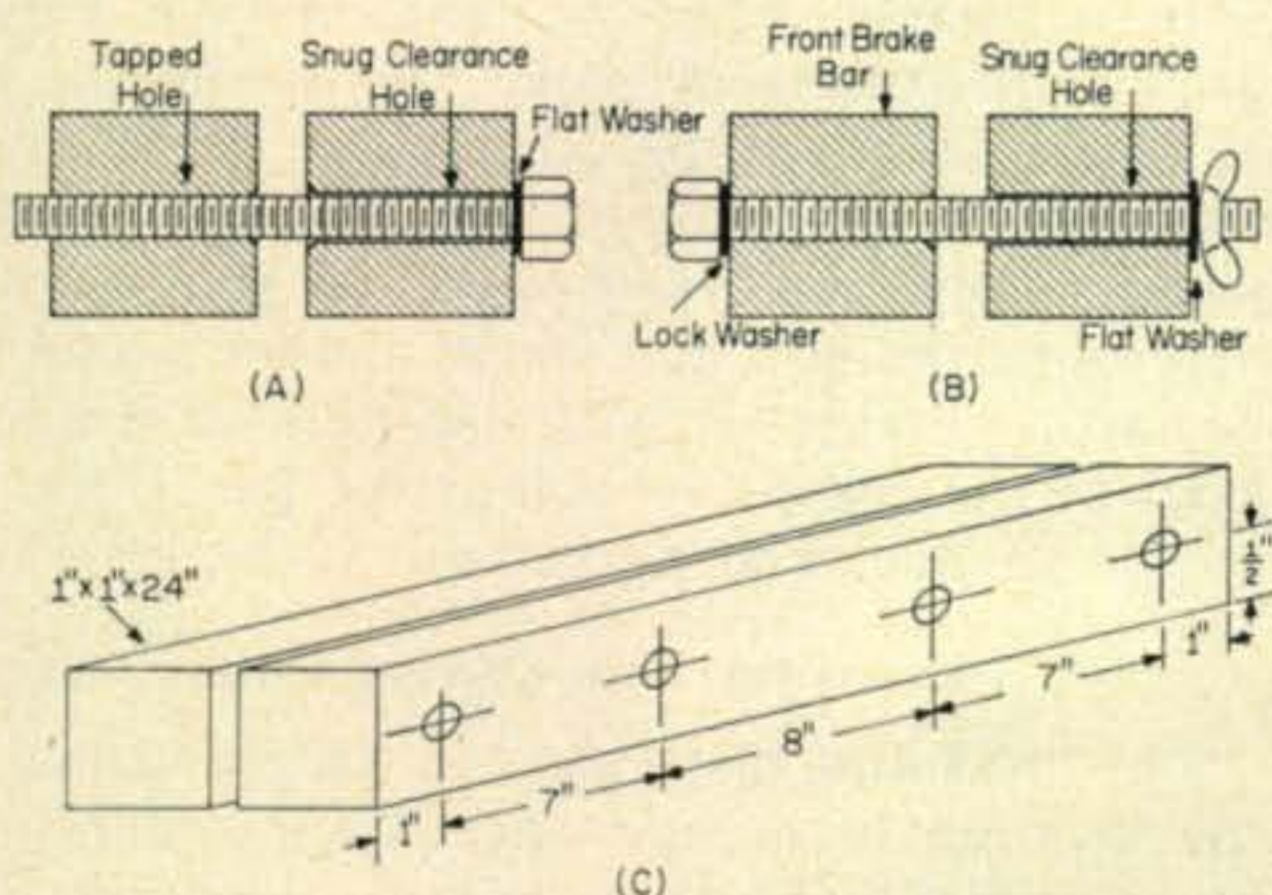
Fabrication of brake bars. The holes should be drilled in the bars as at (C) using the same procedure as described in fig. 2 for the angles. They may then be held together using either of the arrangements as shown at (A) and (B).
